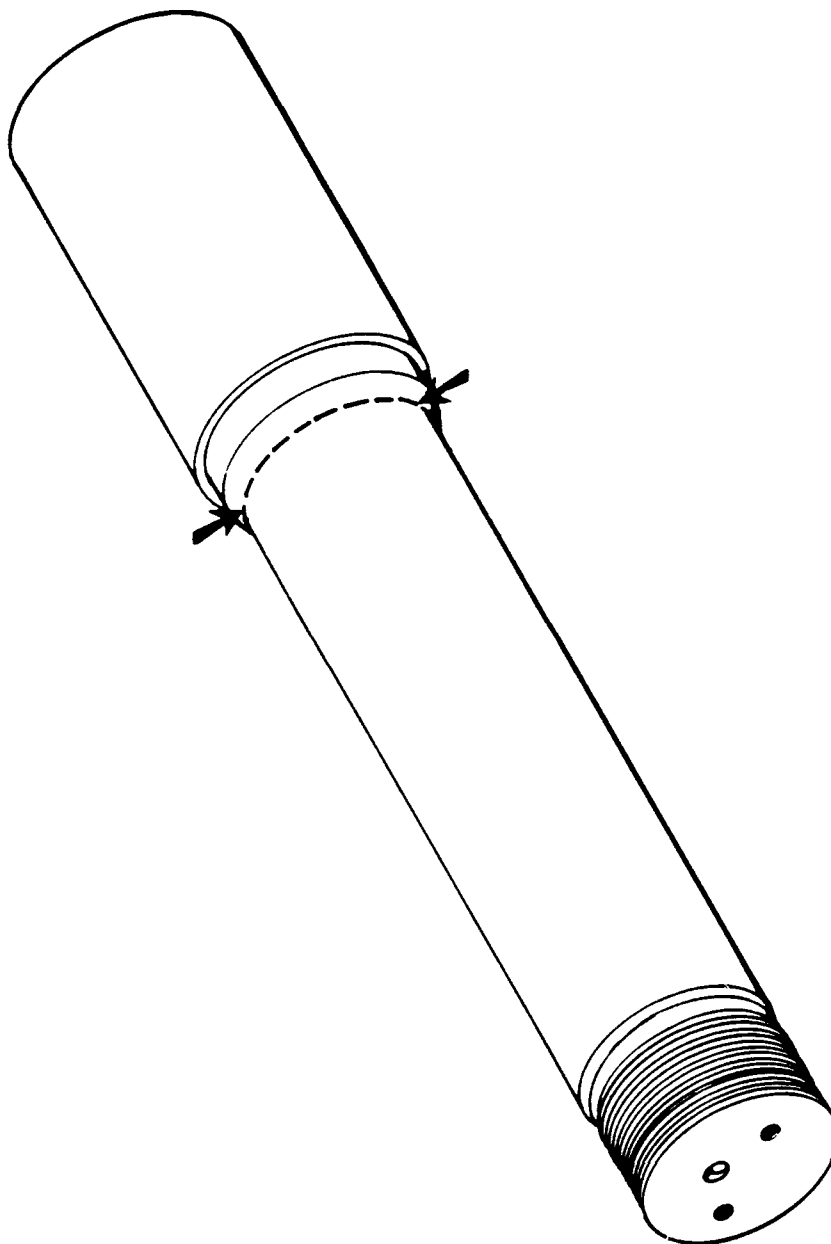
Schematic of fatigue testing mandrel showing location of failure.
